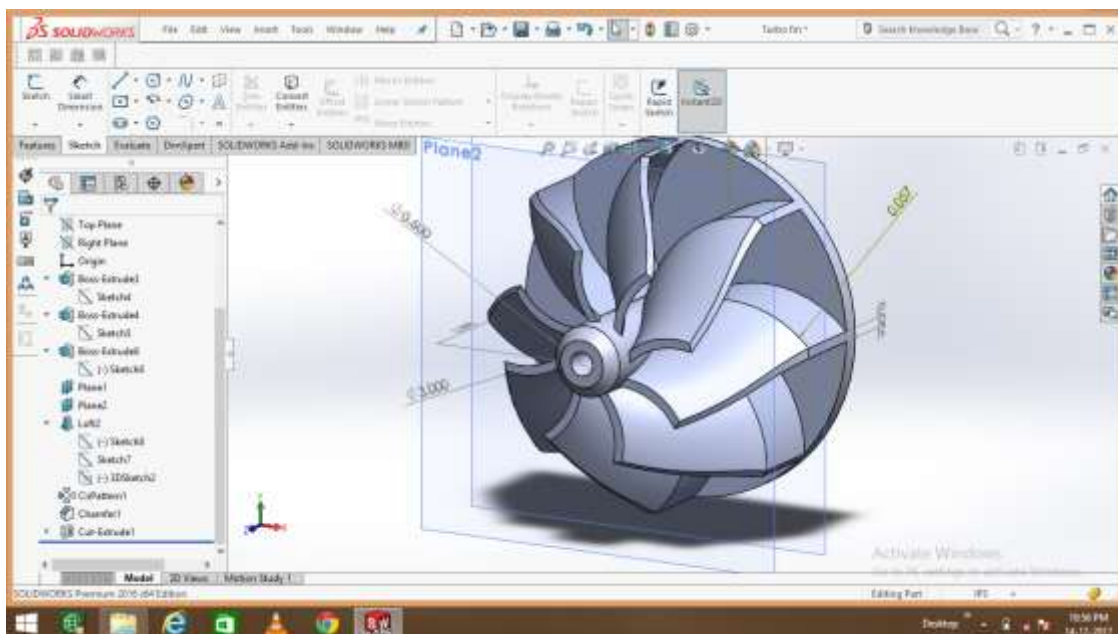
SOLIDWORKS Design interface of turbocharger impeller
